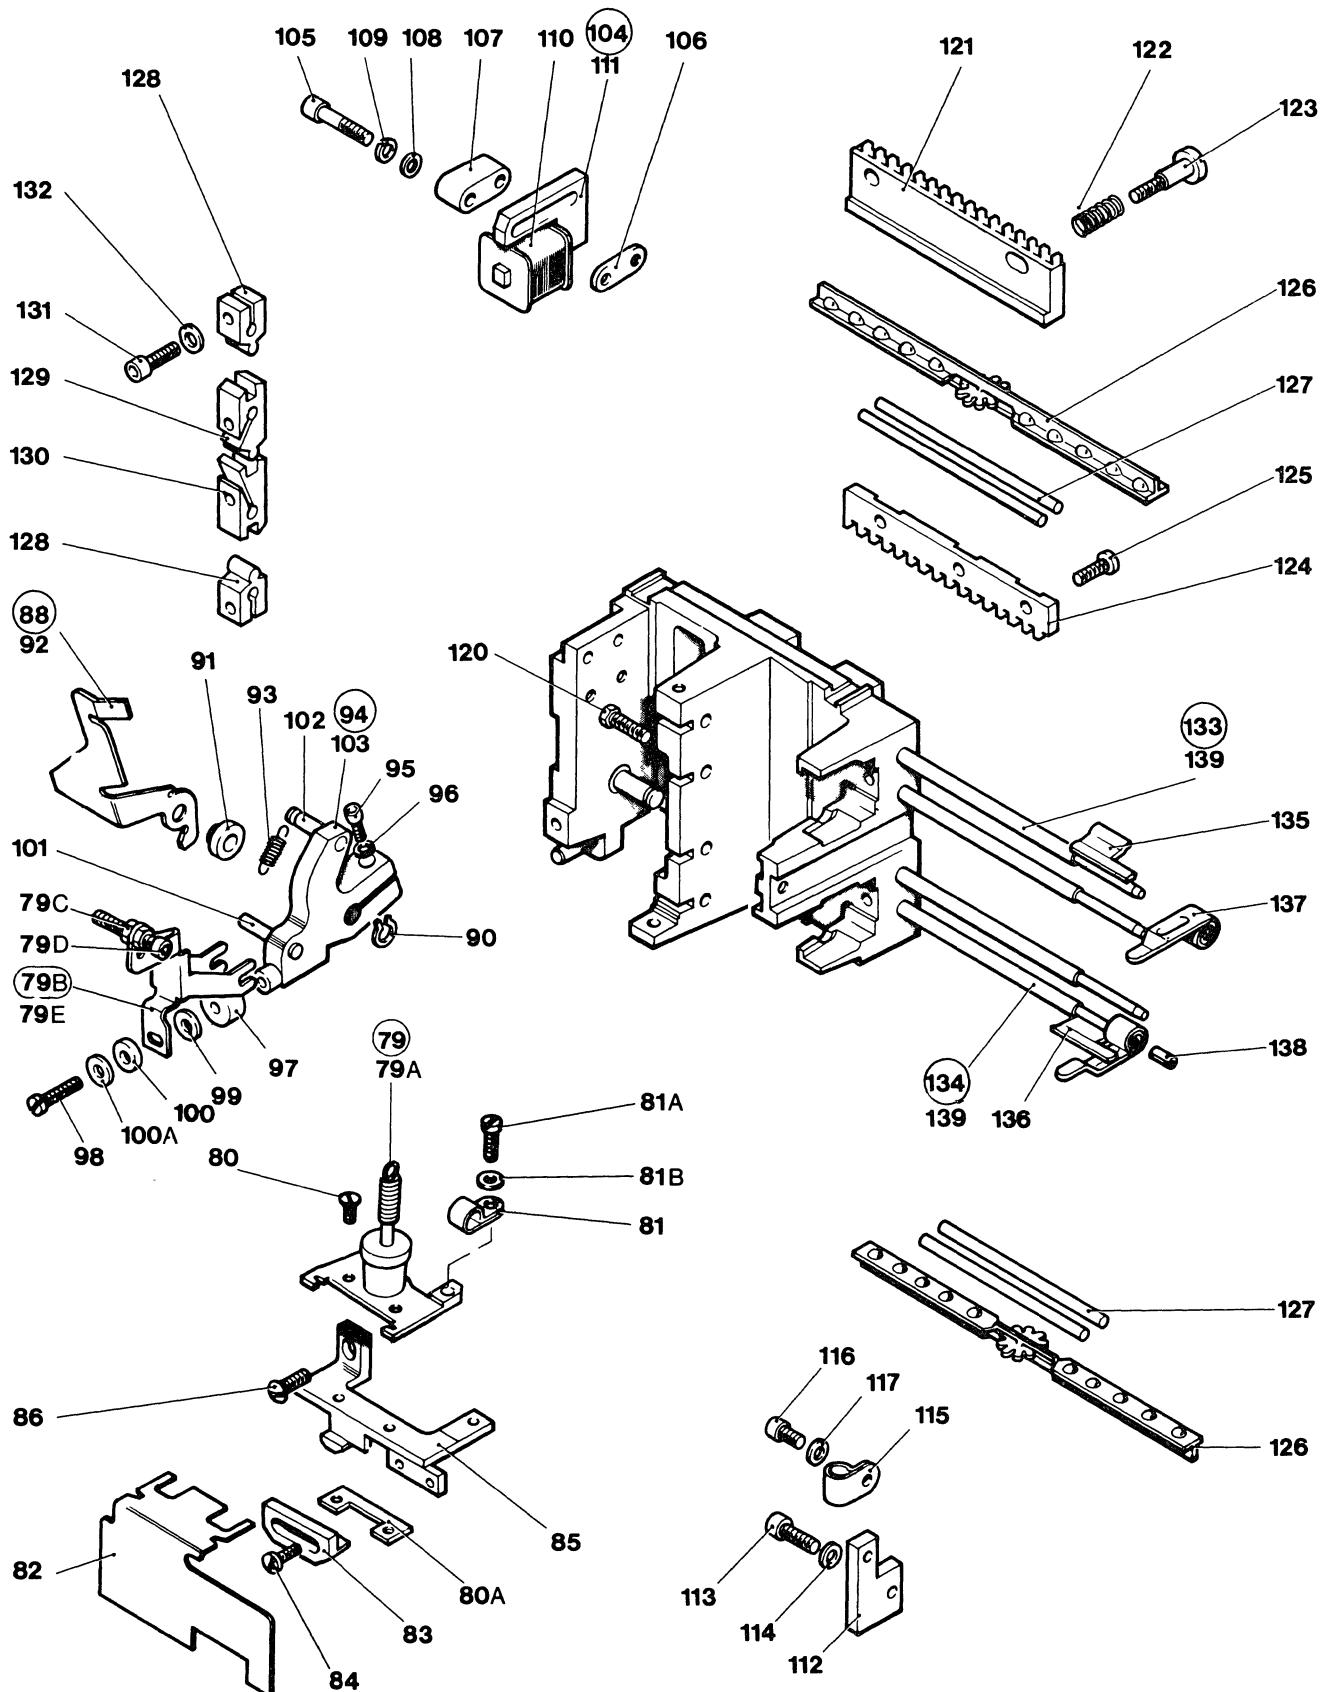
ACTUATOR ASSEMBLY (PART 3 OF 4)
